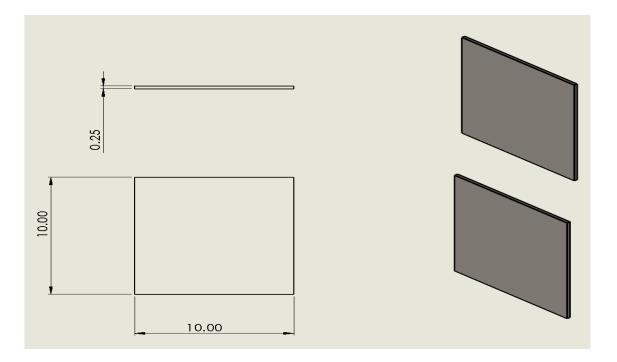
Drawing of the C-channel Bottom component, with dimensions given in inches.
